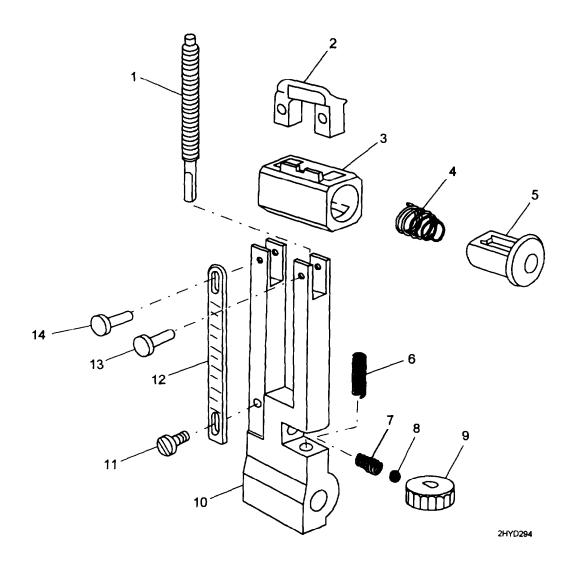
Group 1201 Rear Sight Leaf Assembly (M60 only), PN 7269279
